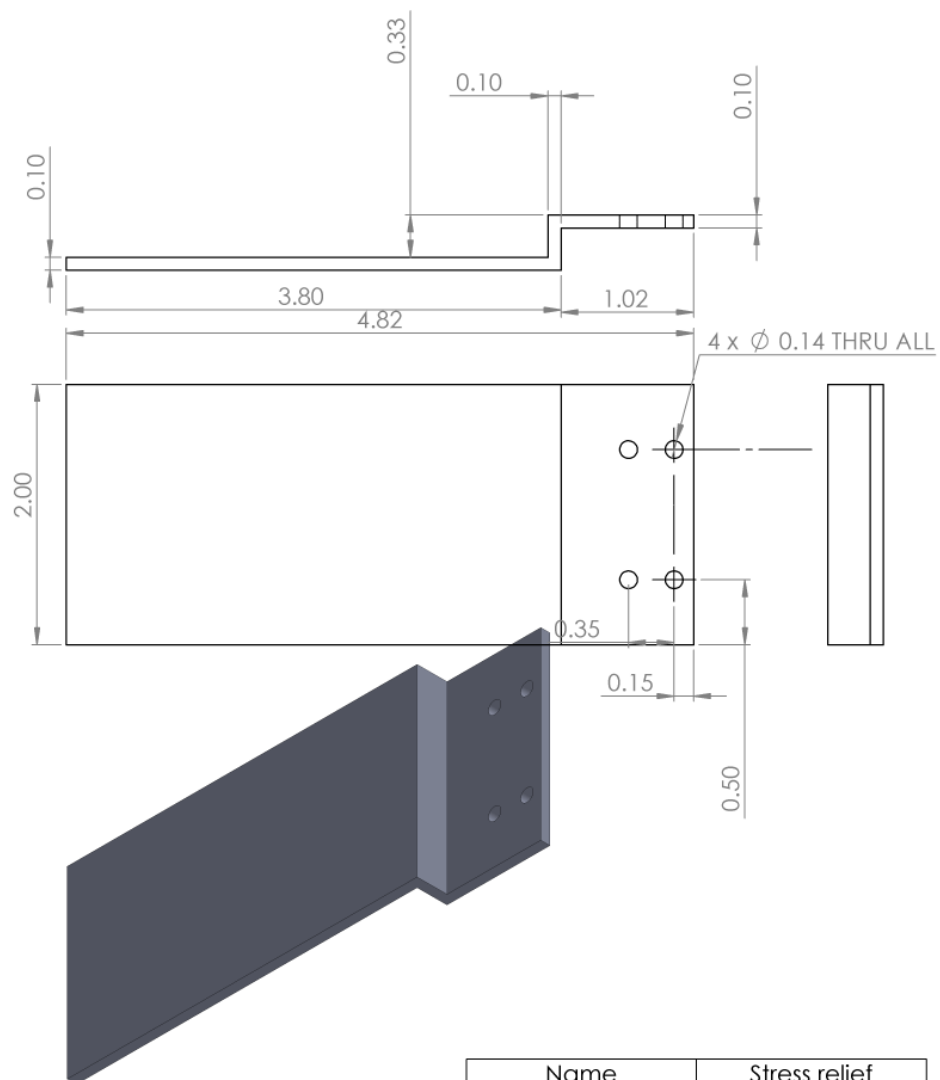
Fourth generation device stress relief. Two of those parts were machined out of invar.
